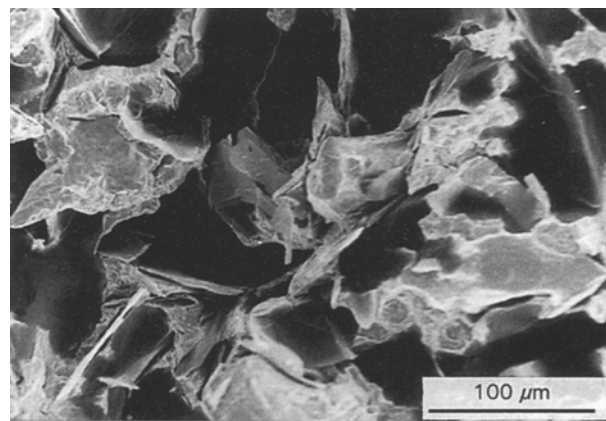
Fractograph of Alloy D specimen taken 210 mm from chill end and cast using a 25 mm chill.
